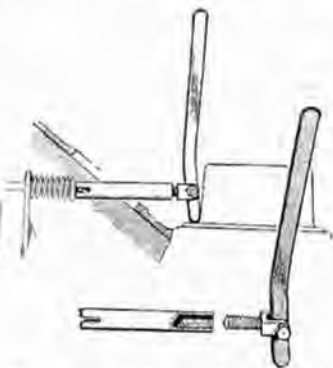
A simple tool for compressing the clutch springs to enable the cotter to be withdrawn.
